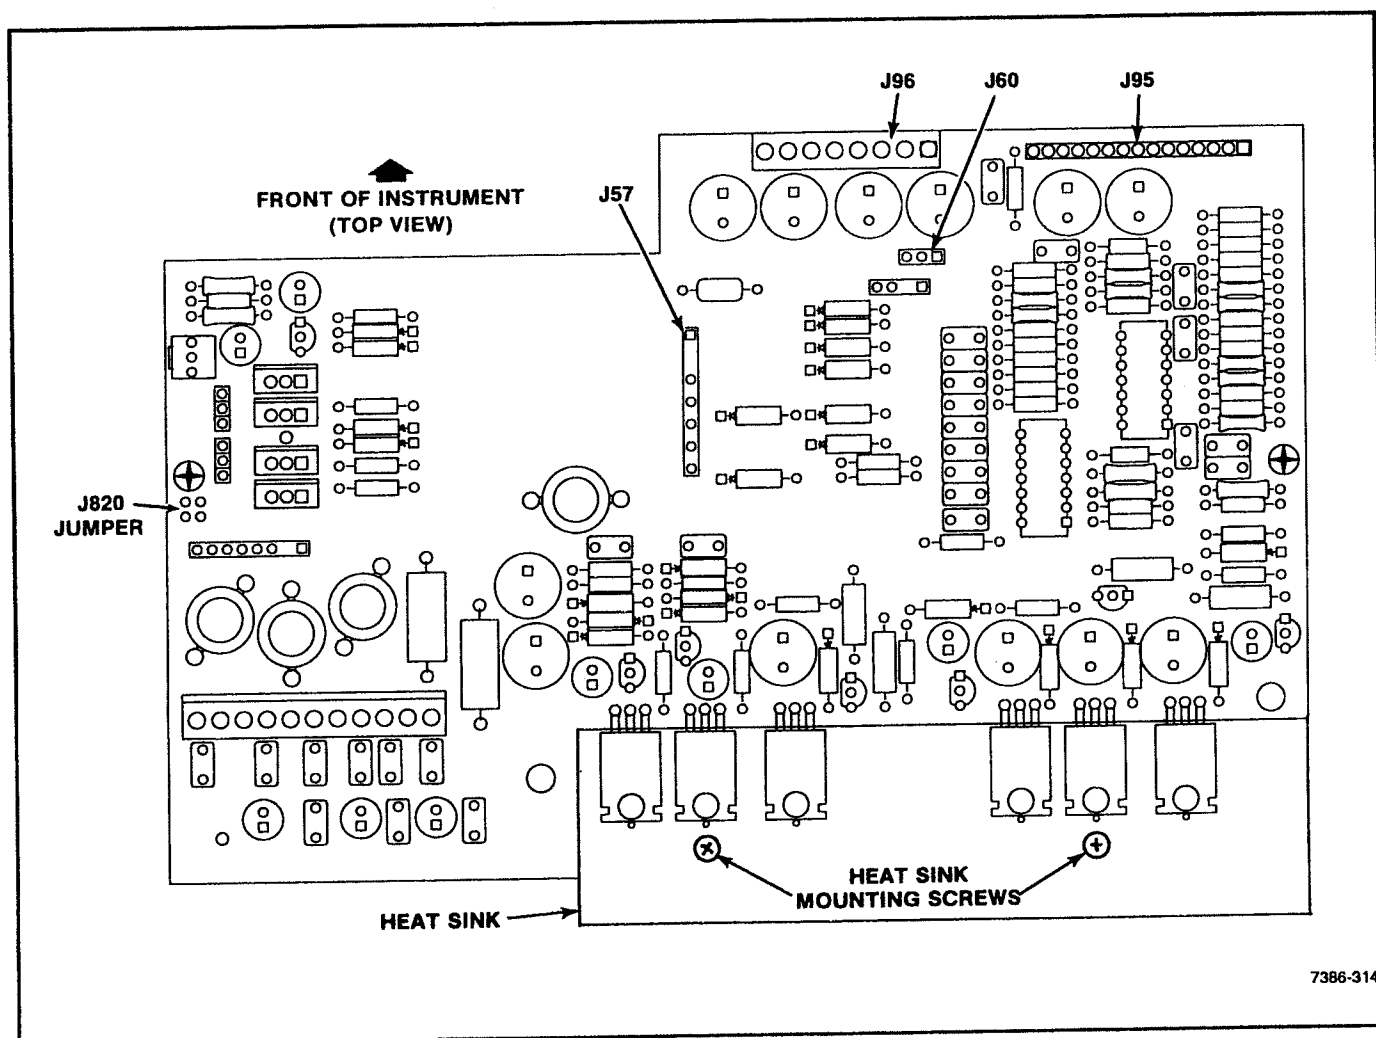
Connector locations for removal of the A4 Regulator board.
